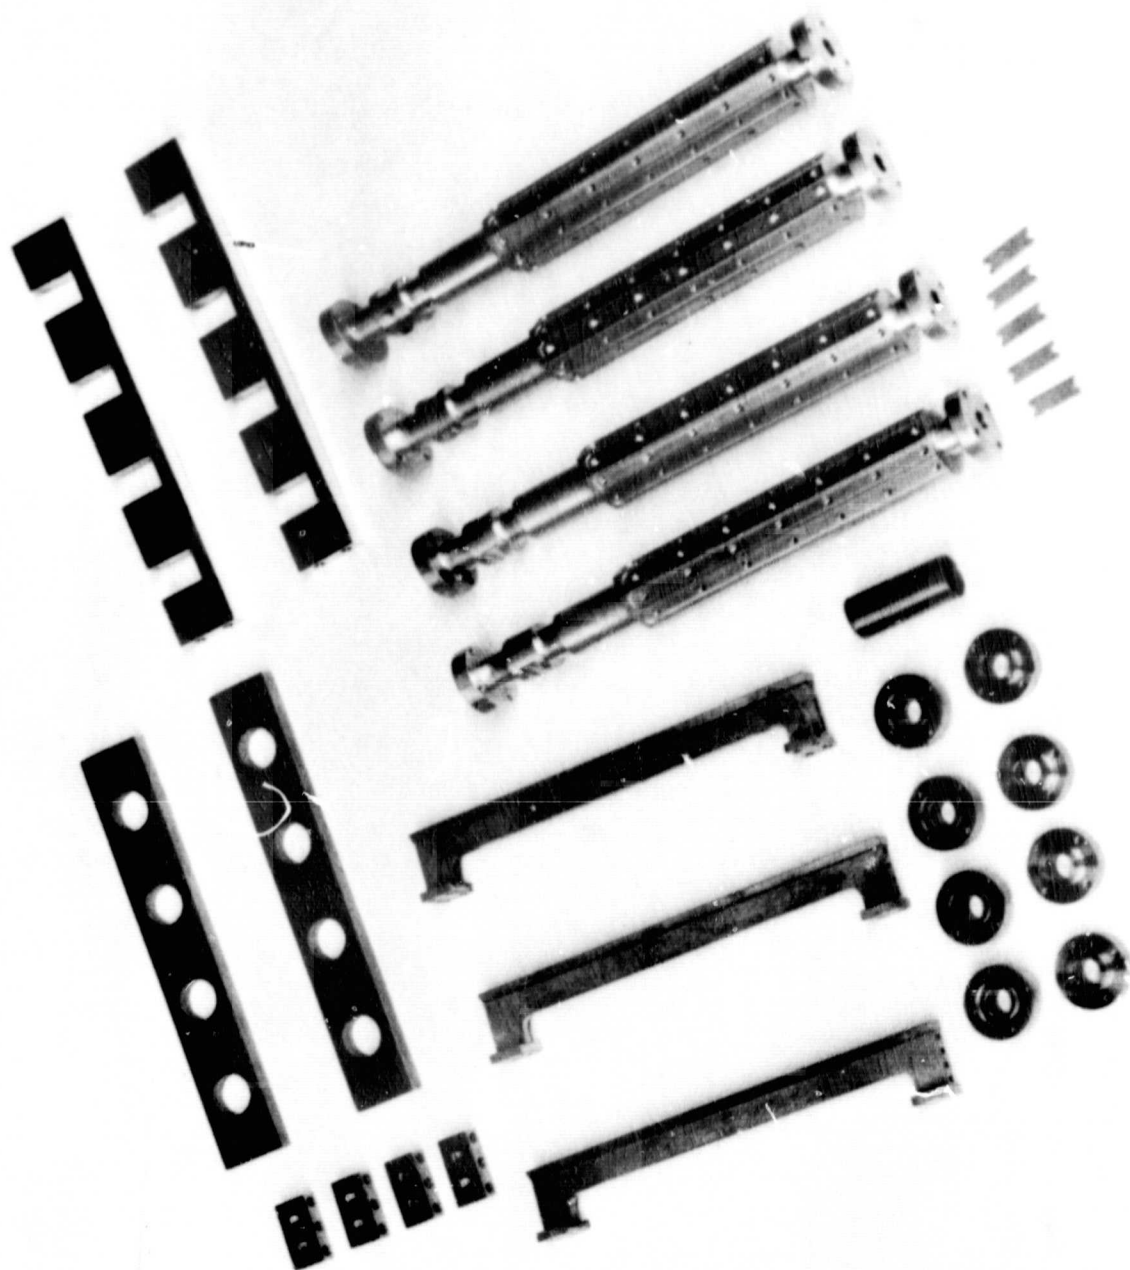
Principal Parts of the Multipurpose Sample Holder.
